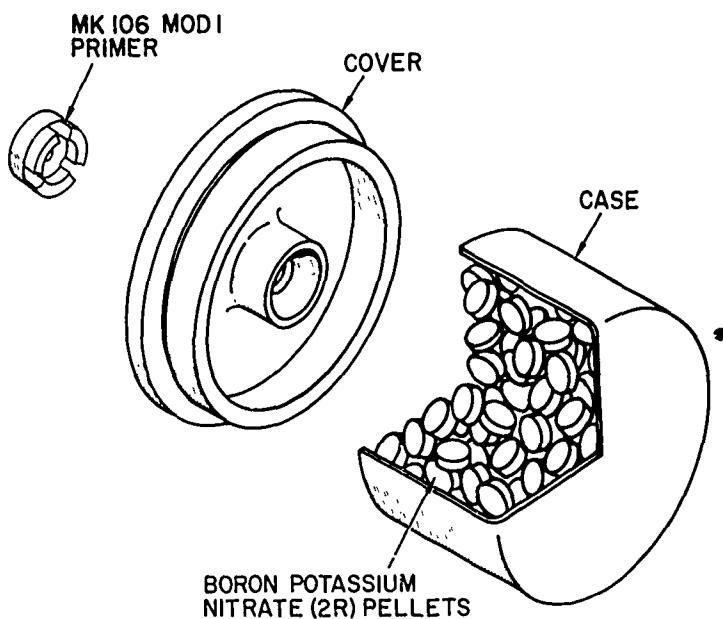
Rocket Motor Igniter Mk 196 Mod 0.
